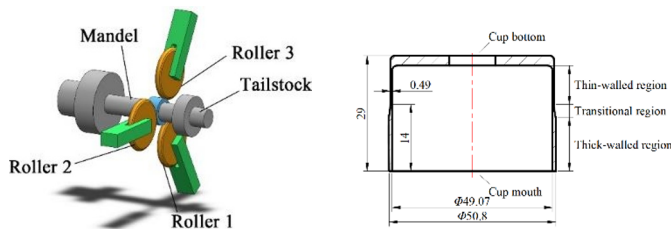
Forming method for cup-shaped blank: (a) schematic illustration of the three-roller stagger spinning of cup-shaped blank (b) structure illustration of cup-shaped blank
